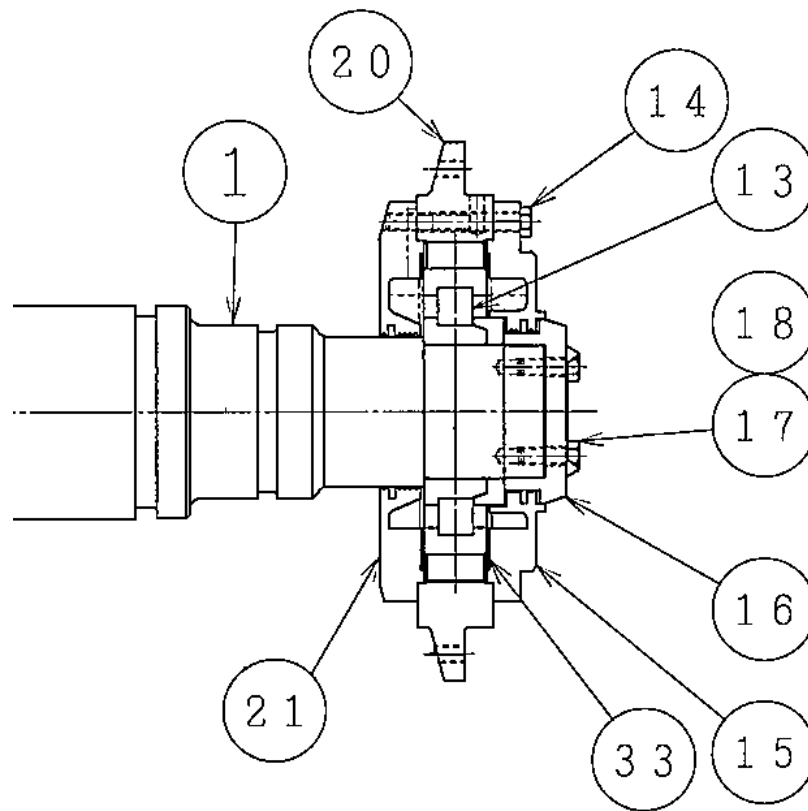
Assembly of Opp. Load Side of Roller Bearing.
